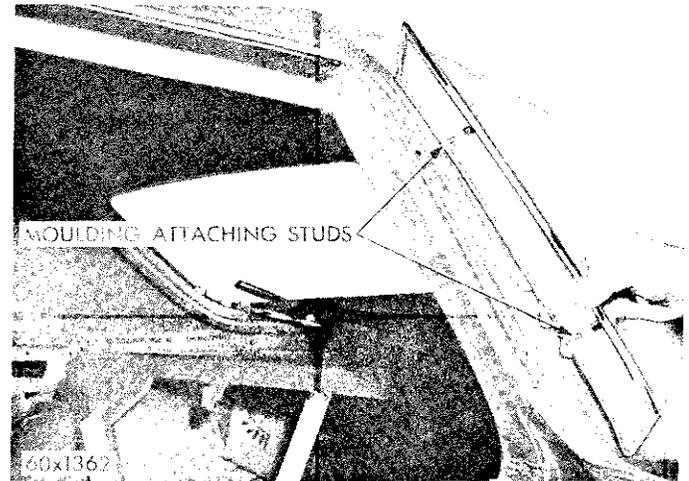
Removing or Installing Lower Body Moulding (Rear)
